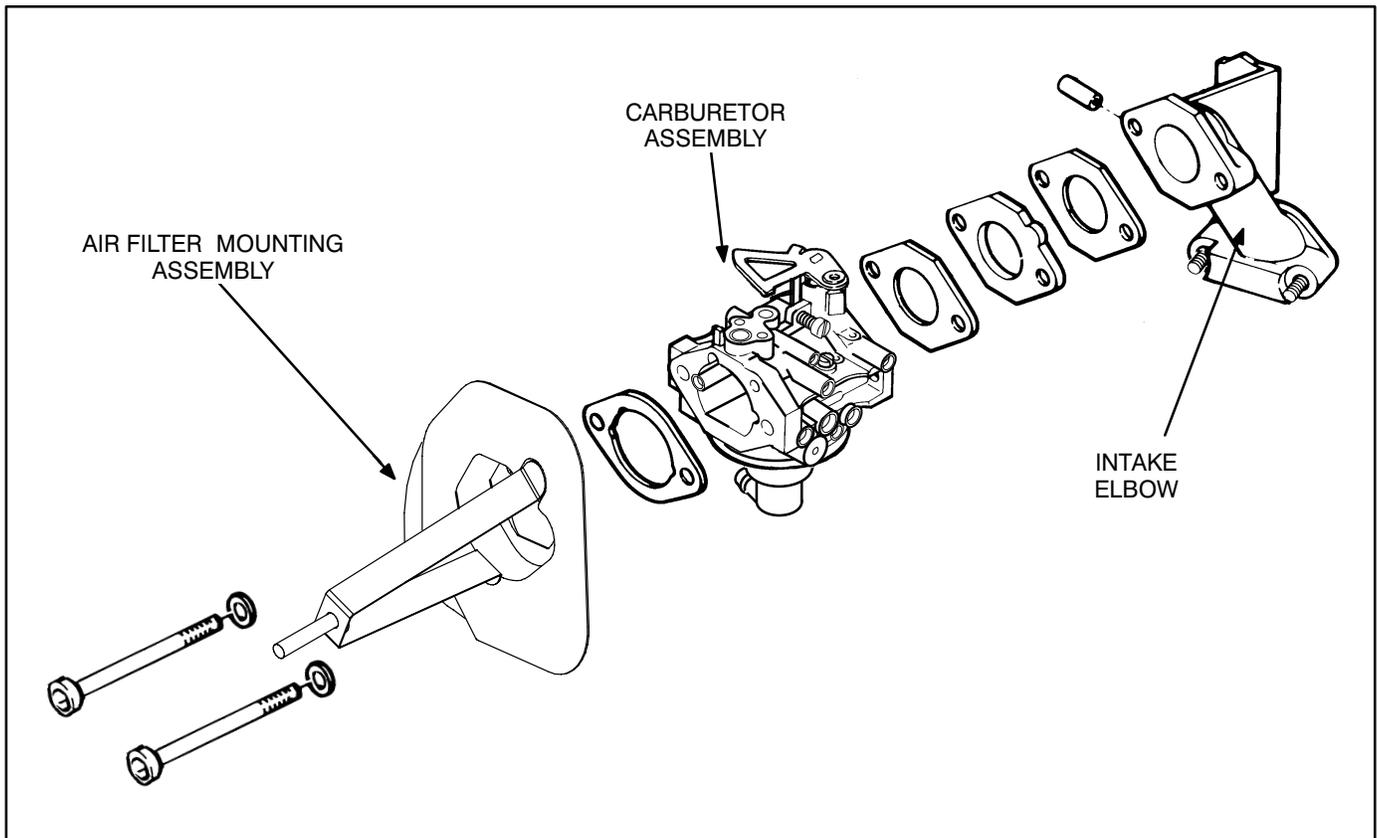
CARBURETOR AND INTAKE MANIFOLD ASSEMBLY
